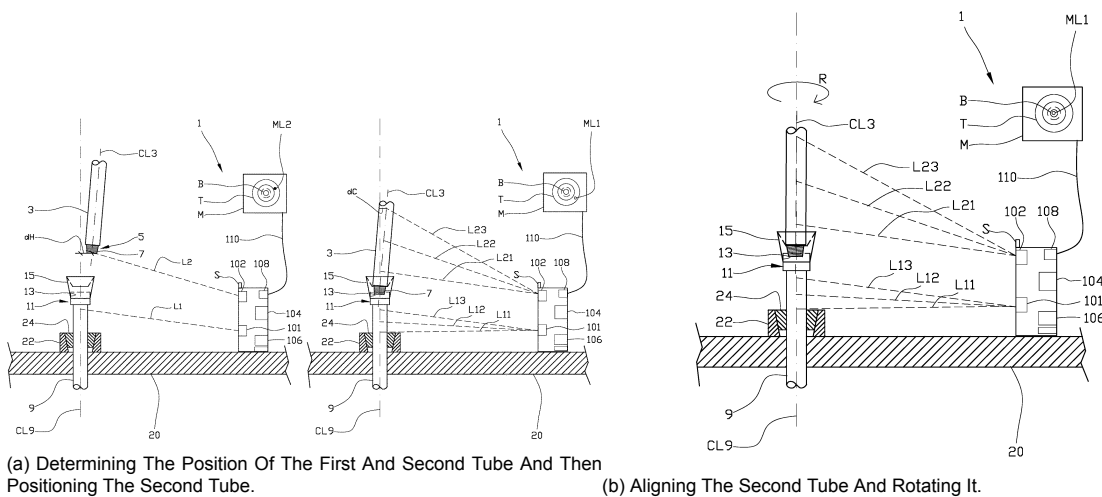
Process Of Placing A Tube On Another Tube Using Laser-Based Scanning Devices [12].
